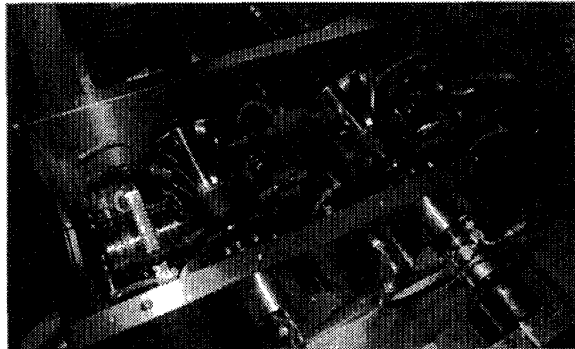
Photograph of prototype S-CVT equipped with zero-spin disk and counter shaft
